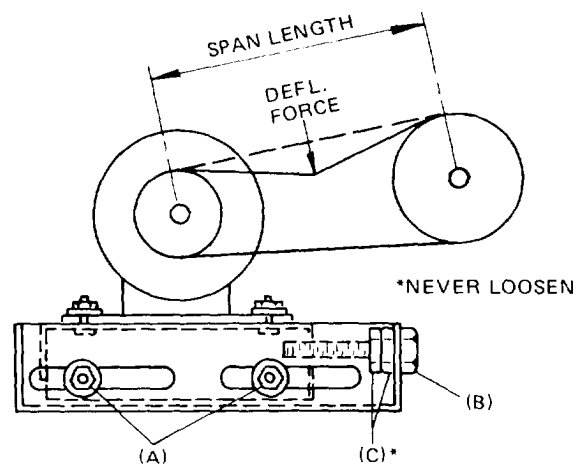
TYPICAL MOTOR MOUNTING ASSEMBLY
